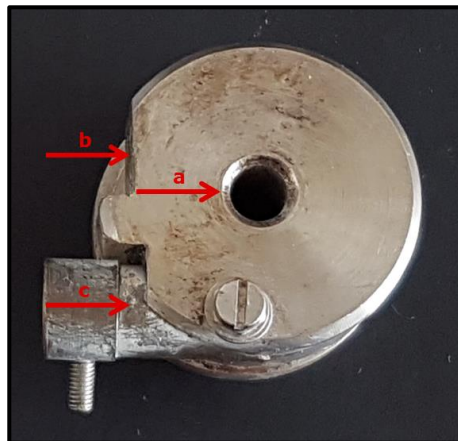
Frontal view of self-built 6 mm conical die; a) die orifice with 6 mm diameter and widened opening for easier extrudate exit, b) adapter for die heater, c) adapter for temperature control.
